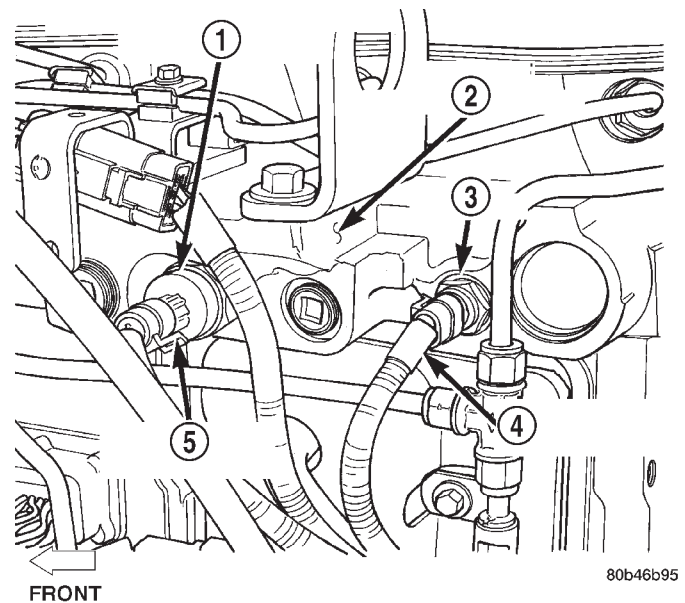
Intake Manifold Air Temperature (IAT) Sensor Location
